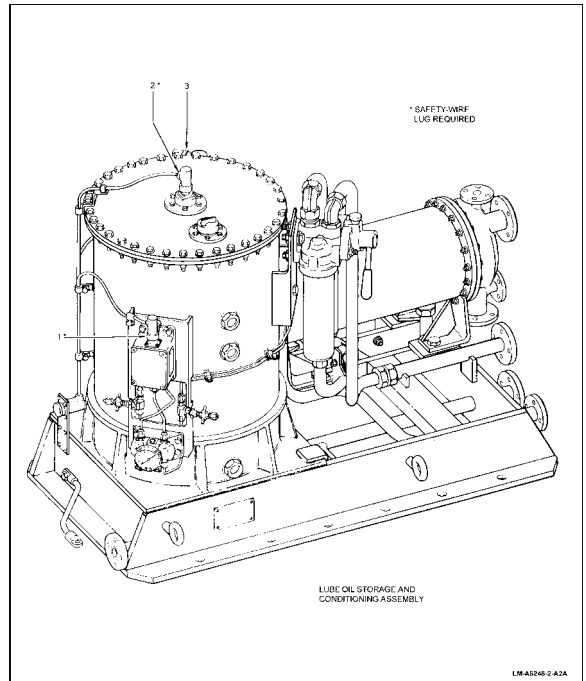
Safety-Wire Locations (Lube Oil Storage and Conditioning Assembly)
